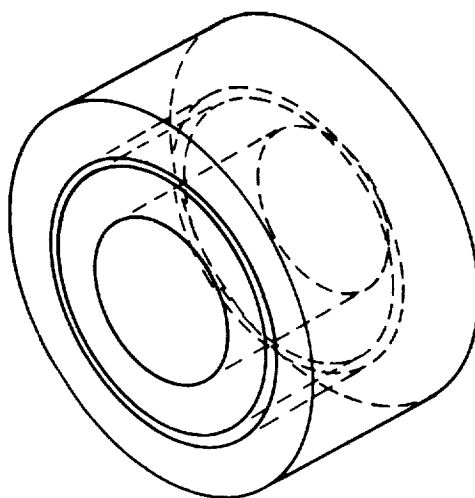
Perspective View of Stator for Magnetic Thrust Bearing
